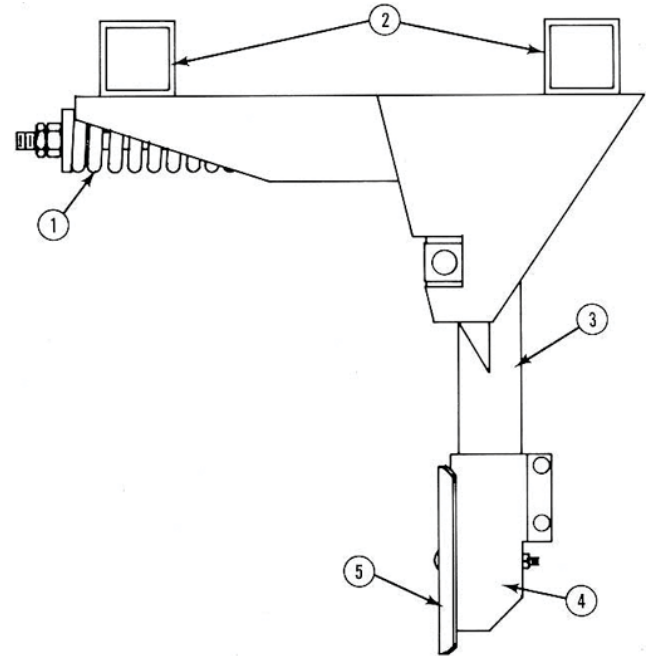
Hoe Assembly: (1) Cushion Spring, (2) Frame Mounts, (3) Shank, (4) Boot, (5) Hoe Opener.
